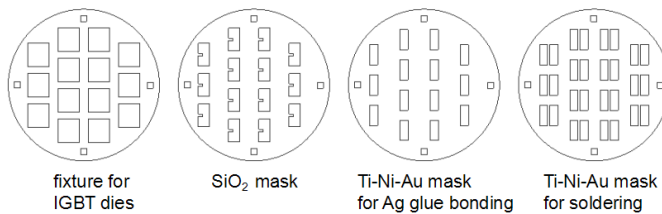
Fig.4. Fixture and masks for reprocessing.
